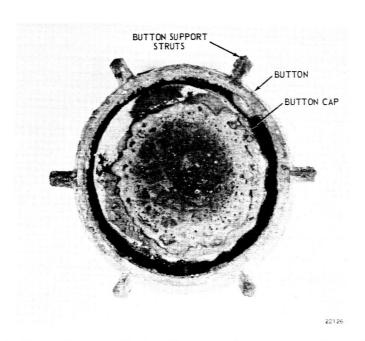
Vortex Valve Button Assembly (Post Firing)
